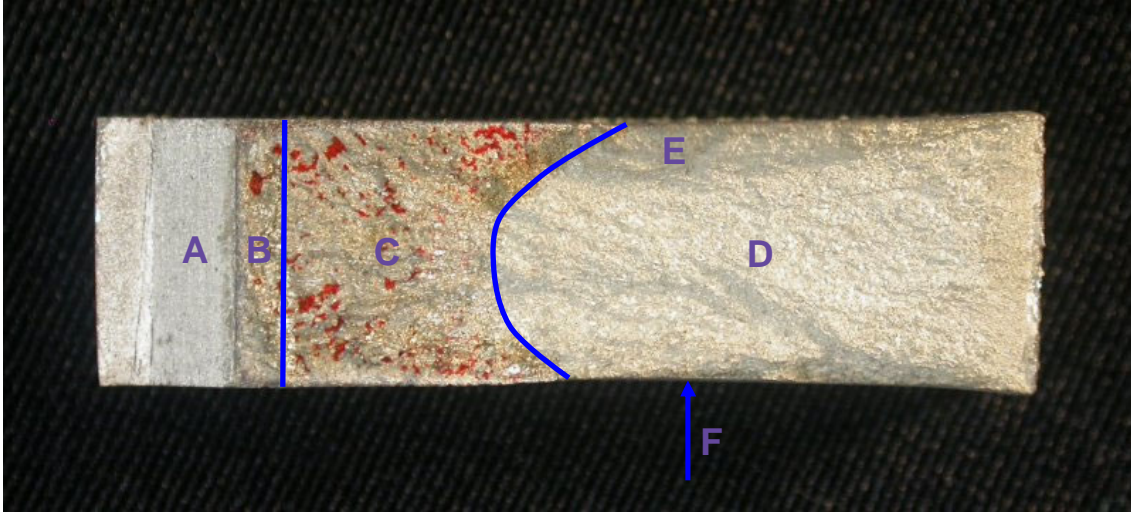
Overview of fracture surface for AZ31 CT specimen tested in distilled water at $2 \mu\text{m/h}$ showing: (A) machined notch; (B) fatigue pre-cracked zone; (C) SCC zone; (D) final fracture zone; (E) shear lips; and (F) deformation in the thickness direction. The red patches are due to dye penetrant marking of the SCC zone before final fracture.
